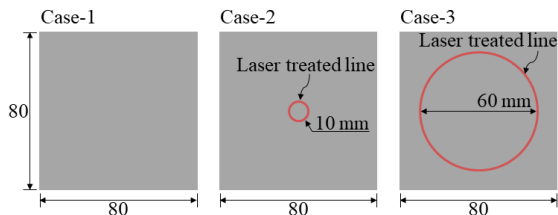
Rectangular blank shape (80×80 mm) and laser heat treated line: Case-1 is initial blank (no treatment); Case-2 is laser treated blank at center with 10 mm diameter circle; Case-3 is surface treated blank with 60 mm diameter circle at edge
